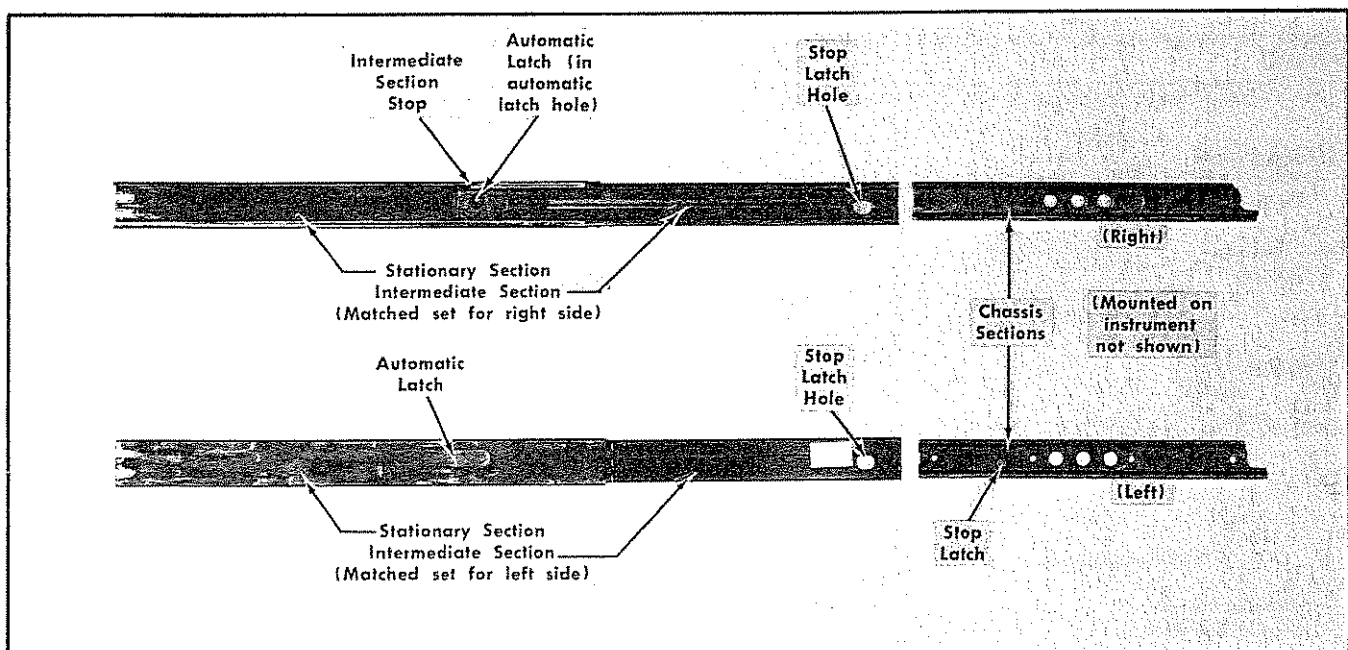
Illustration showing the 1 3/4-inch wide slide-out track assemblies.
